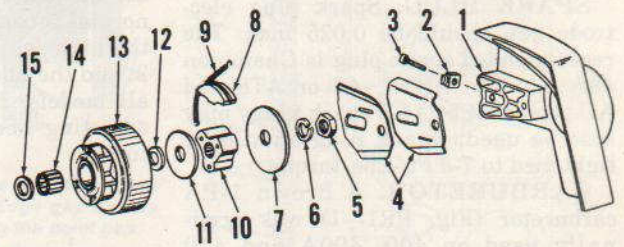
Exploded view of typical clutch assembly. On clutch shown, three shoes (8) are used.
